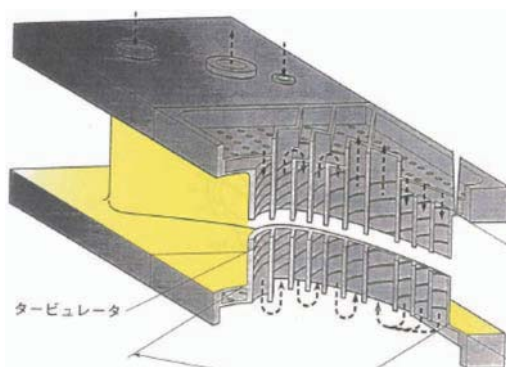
Cooling structure of the stator blades (Full closed steam cooling, MHI)¹²⁾
